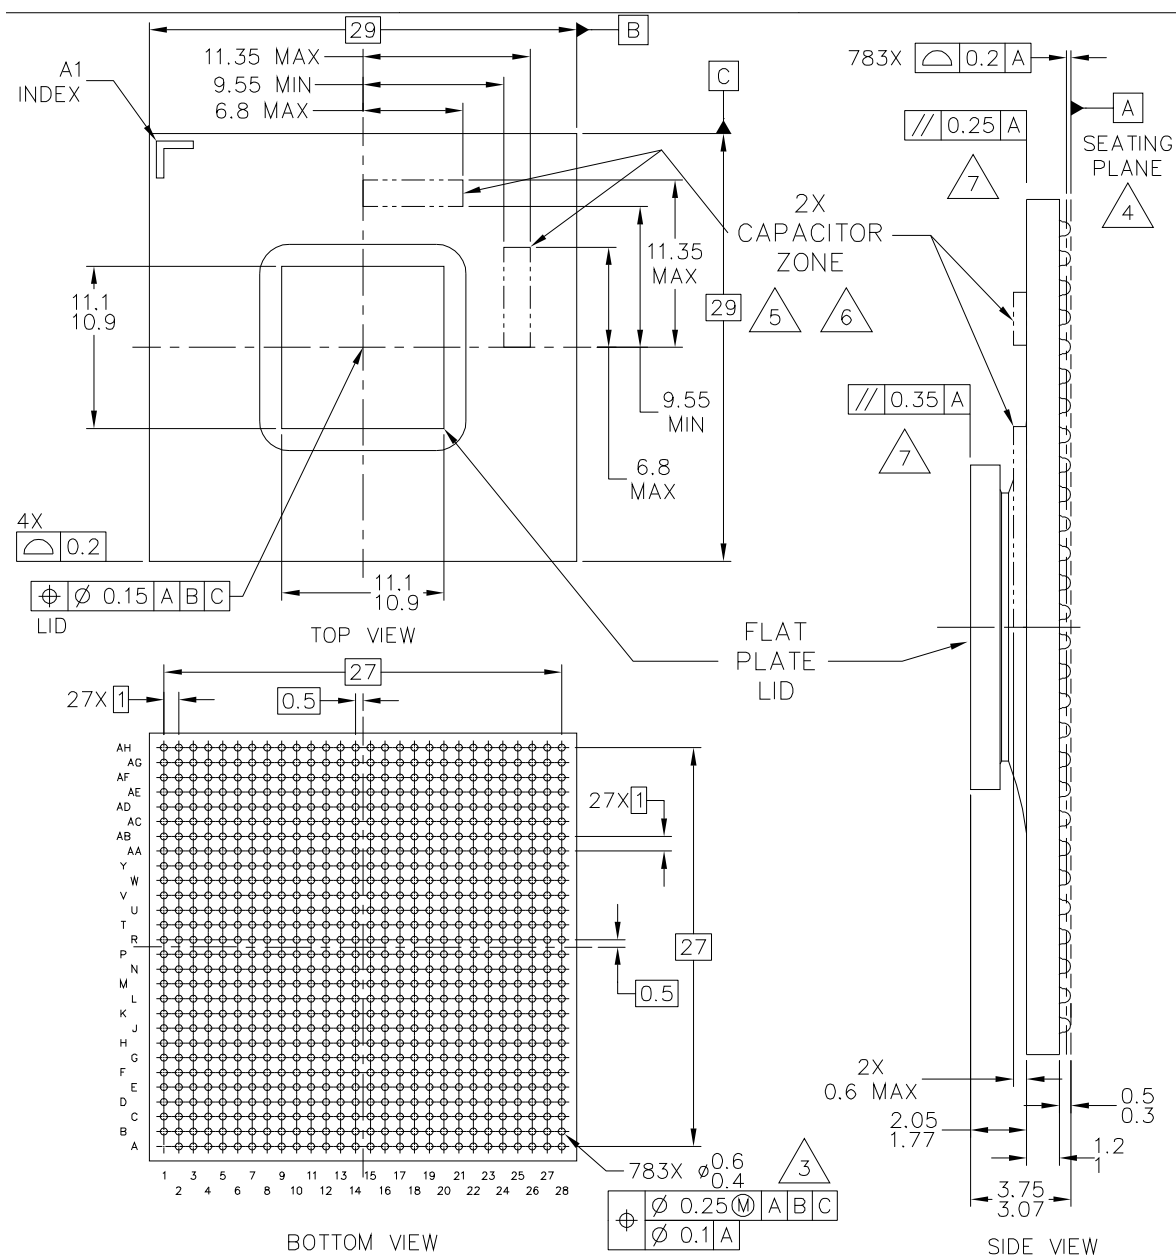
Mechanical Dimensions and Bottom Surface Nomenclature of the FC-PBGA
